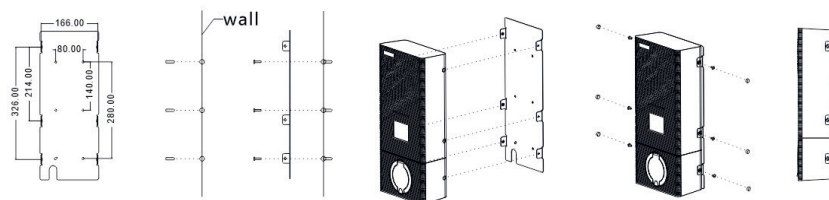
Installation drawing of TELESTAR EC 311 S6 / EC 311 S6 CEE charging station mounting plate
